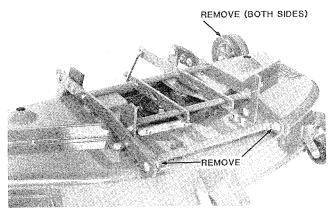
Remove Gage Wheels & Hitch Shaft (Either Mower)
